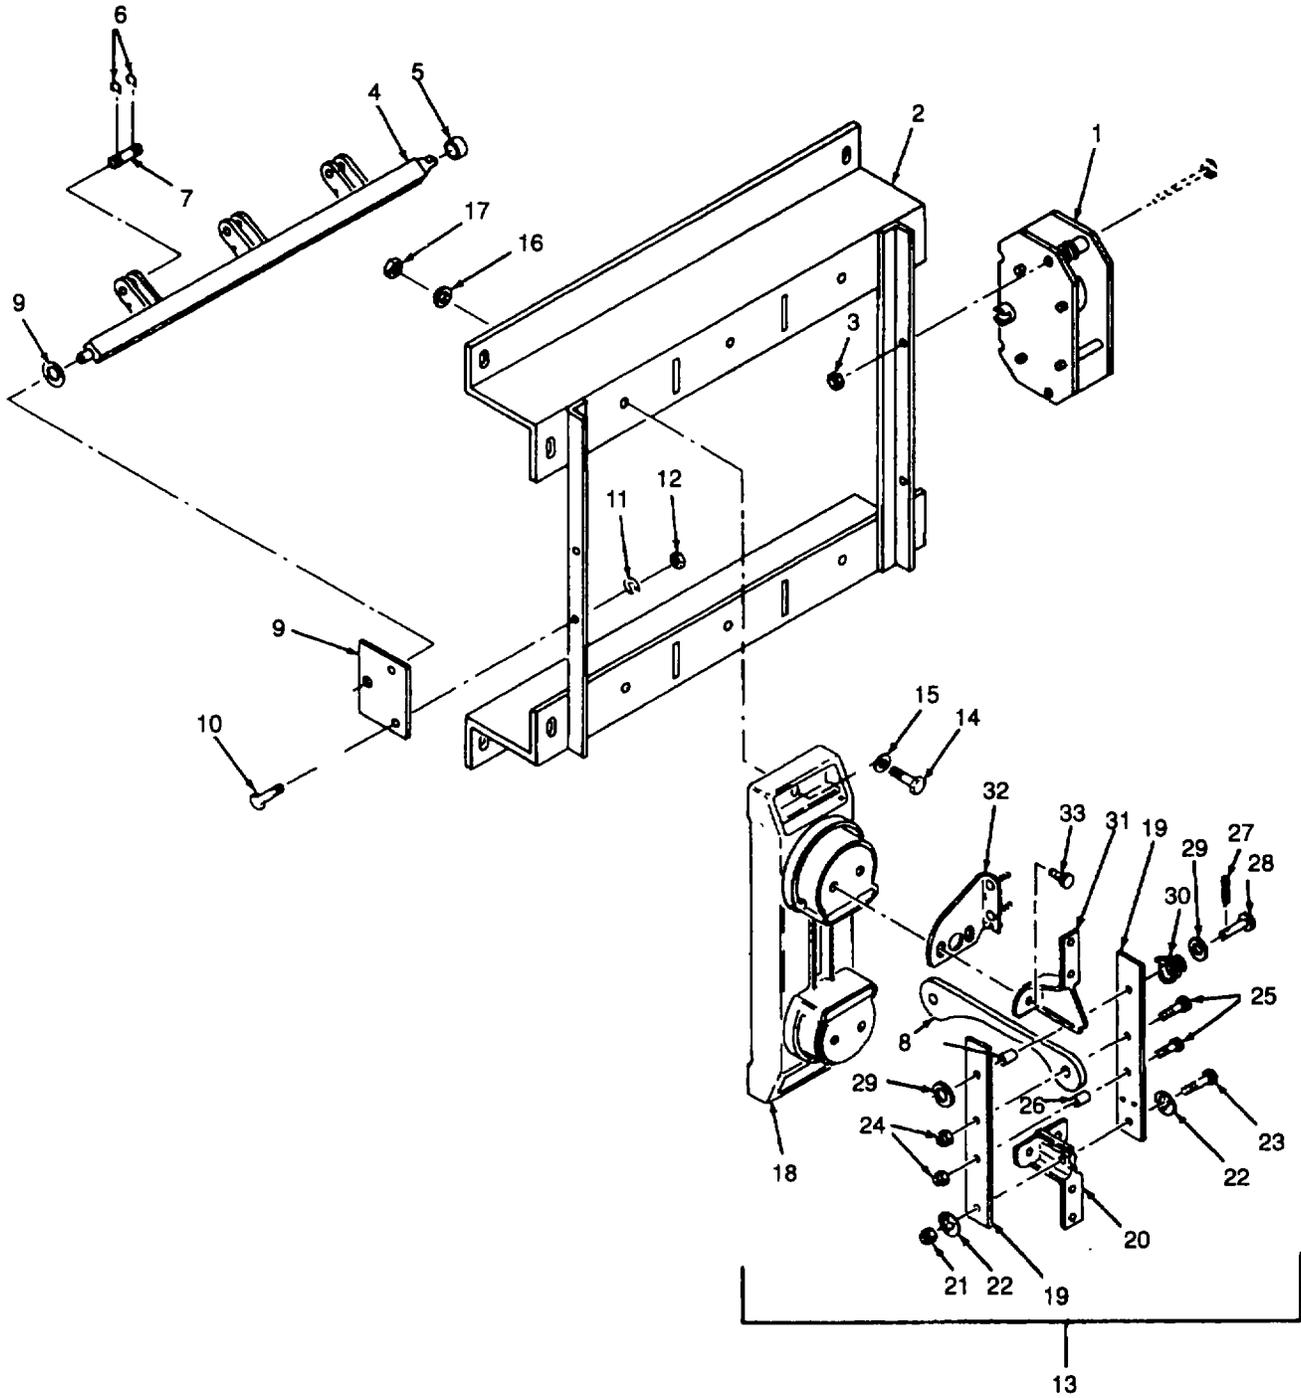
Main Disconnect Switch S120, Exploded View (Sheet 1 of 2)
